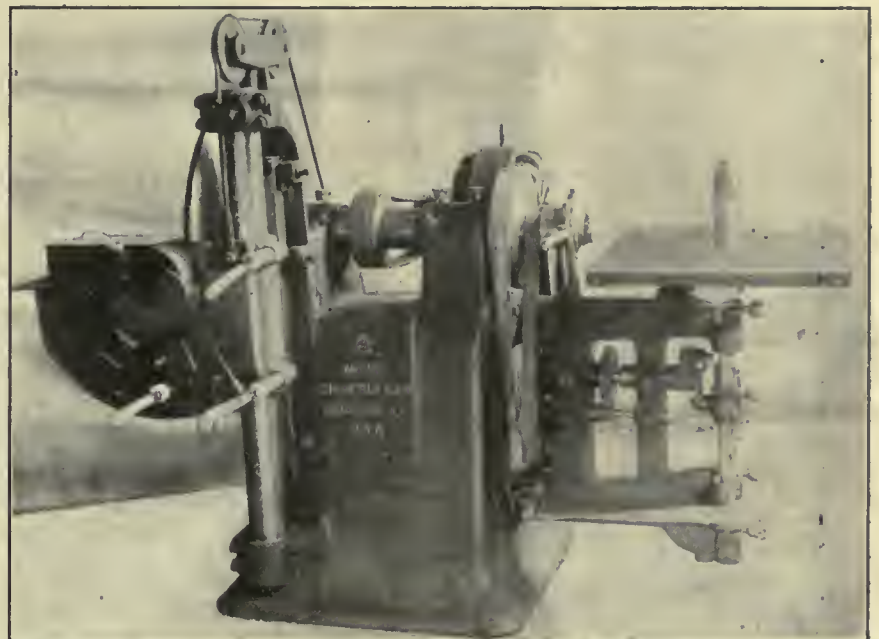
BESLY COMBINATION DISC GRINDER AND DRUM SANDER FOR WOOD PATTERNMAKING.
